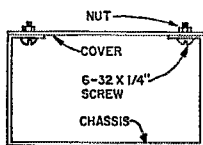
W9NFO's method of attaching a cover plate to a chassis. Each machine screw is held in place by a threaded hole in the chassis lip.
